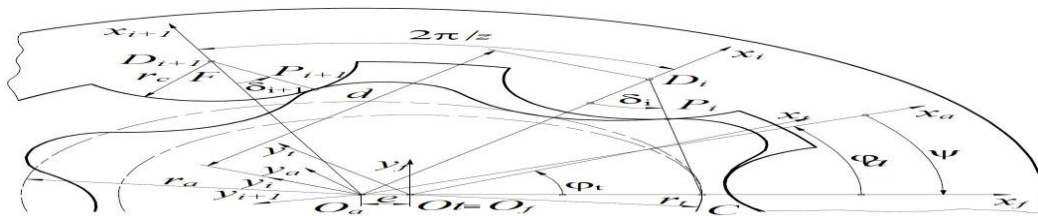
Schematic presentation of gear coupling at trochoidal pump with geometric dimensions [3]
